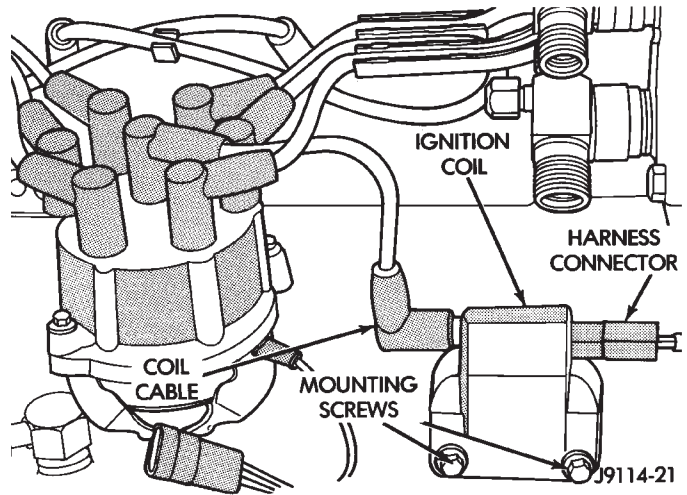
Ignition Coil—Typical (4.0L Shown)
